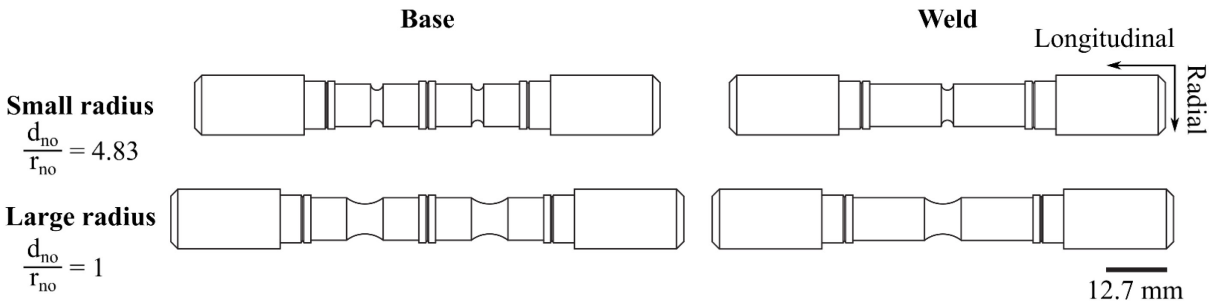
Schematics of small- (top) and large- (bottom) radius U-notch specimens for base (left) and weld (right) metal.
